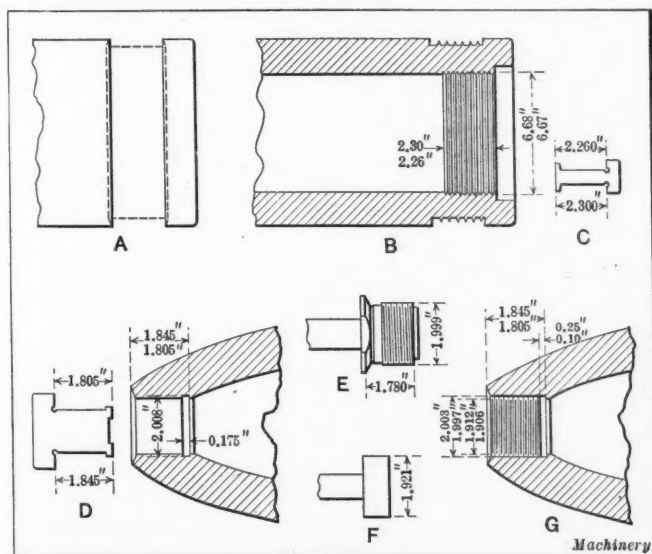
Chamfering Base End, threading Base, recessing Fuse Hole, and threading Nose
